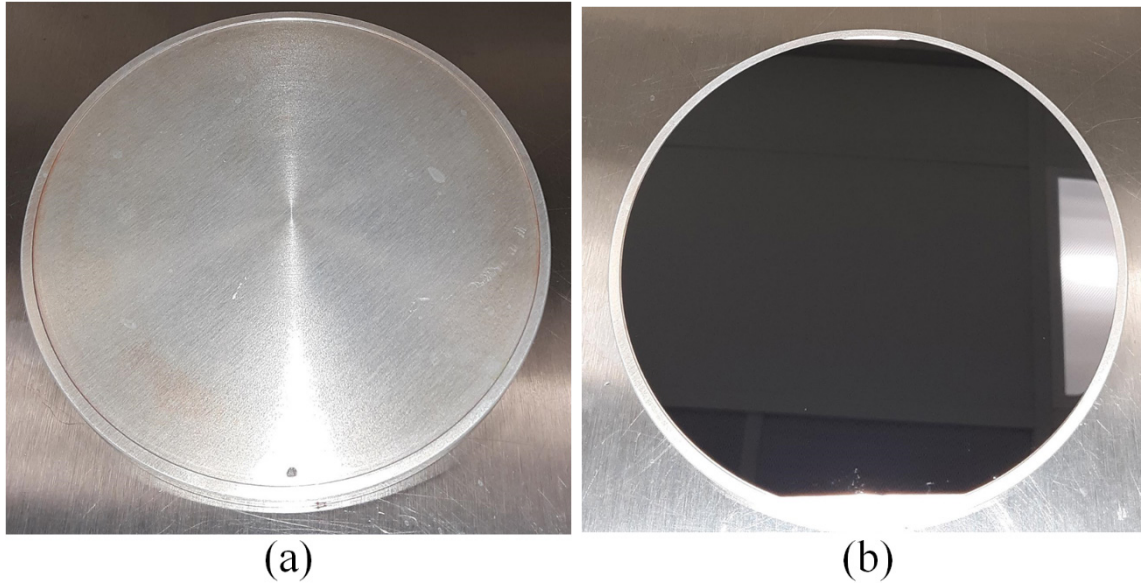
Holding wafer chuck adapted to the spin coating equipment. (a) Chuck without wafer and (b) chuck with wafer.
